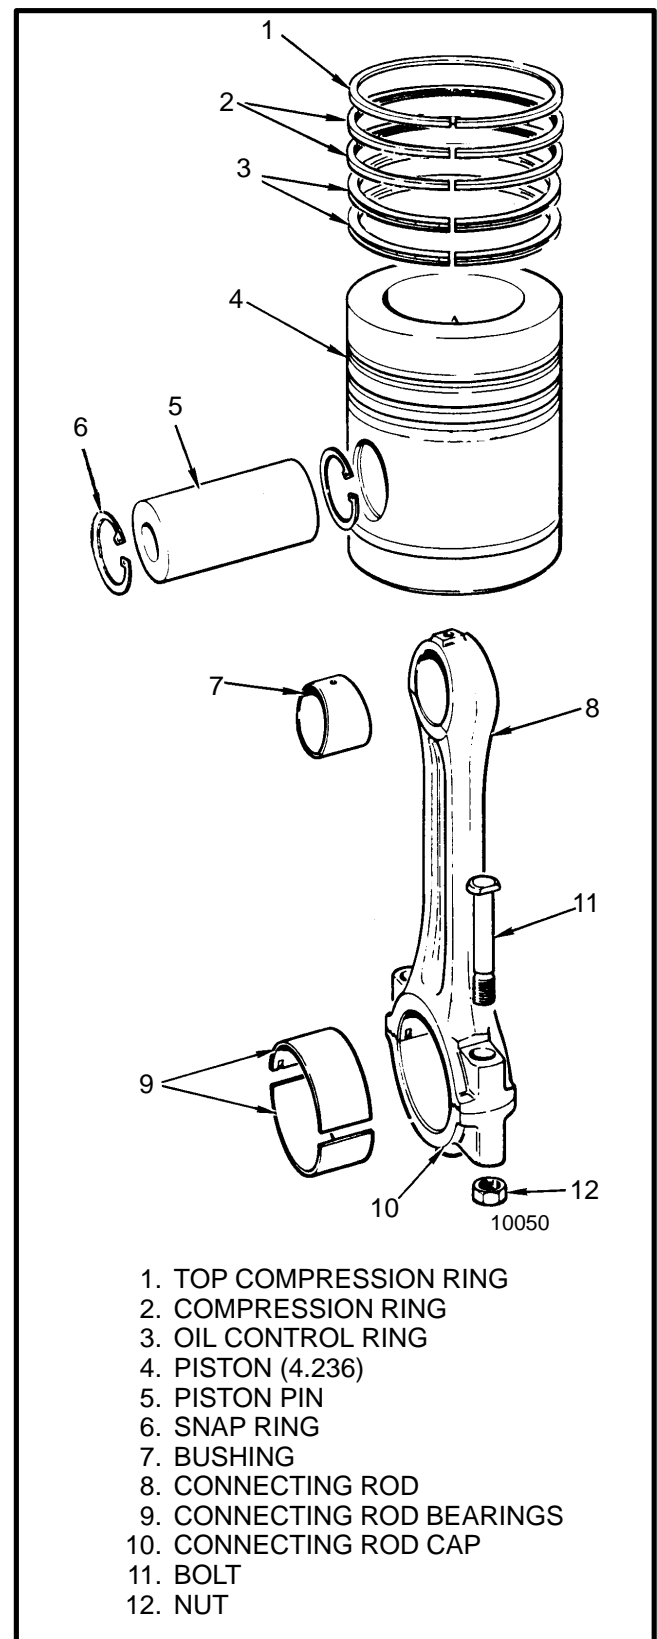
PISTON AND CONNECTING ROD ASSEMBLY
